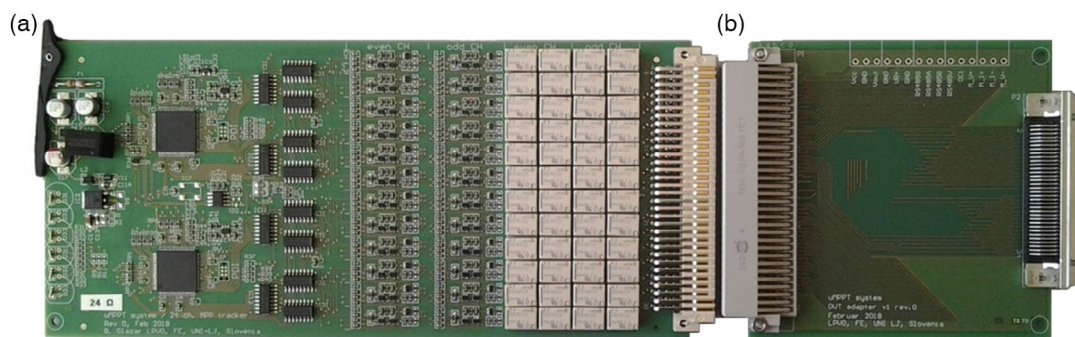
a) 24-channel μ MPPT board, b) DUT adapter board.
